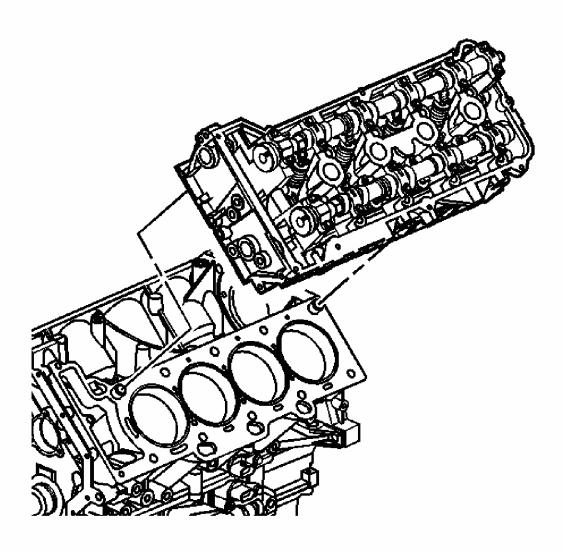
View Of Cylinder Head With Alignment Dowels - Left Courtesy of GENERAL MOTORS CORP.
